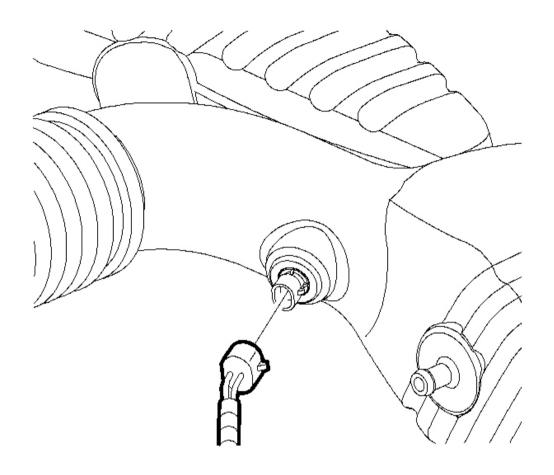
View Of Air Cleaner Outlet Resonator Courtesy of GENERAL MOTORS CORP.
